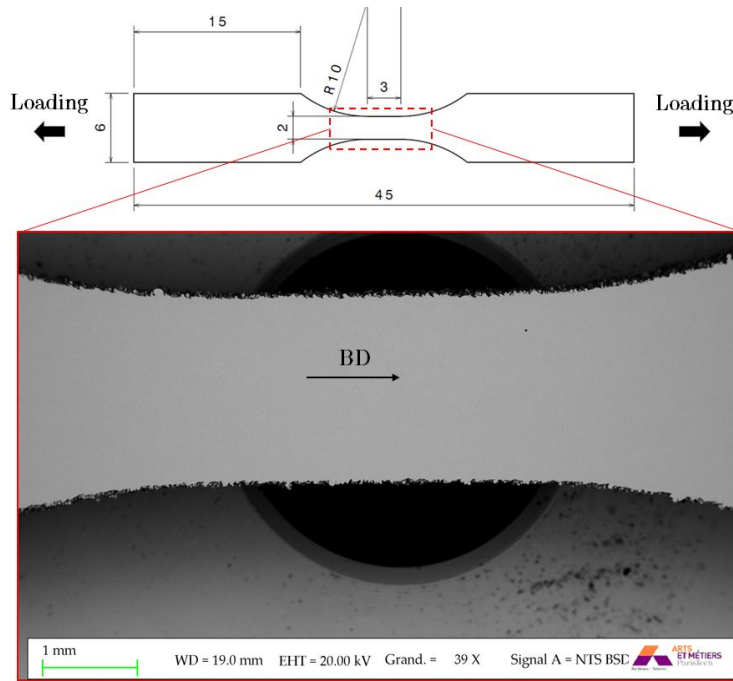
Dimensions of the SLM as-built flat samples used to observe the crack initiation mechanisms occurring during fatigue tests ( $R=0.1$ ).
